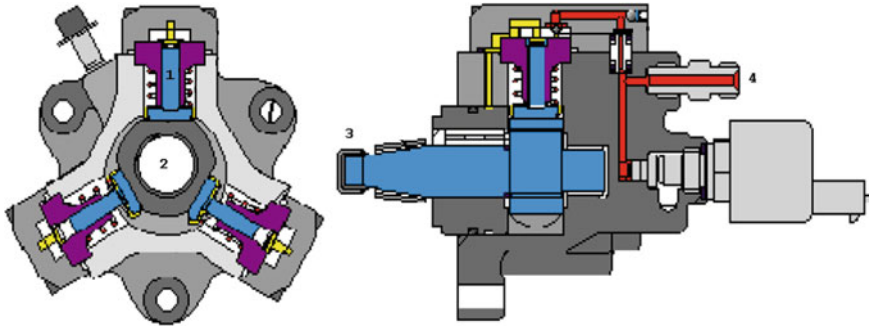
High pressure pump scheme (taken from [8]): 1 piston; 2 triangular cam; 3 shaft; 4 exit hole
